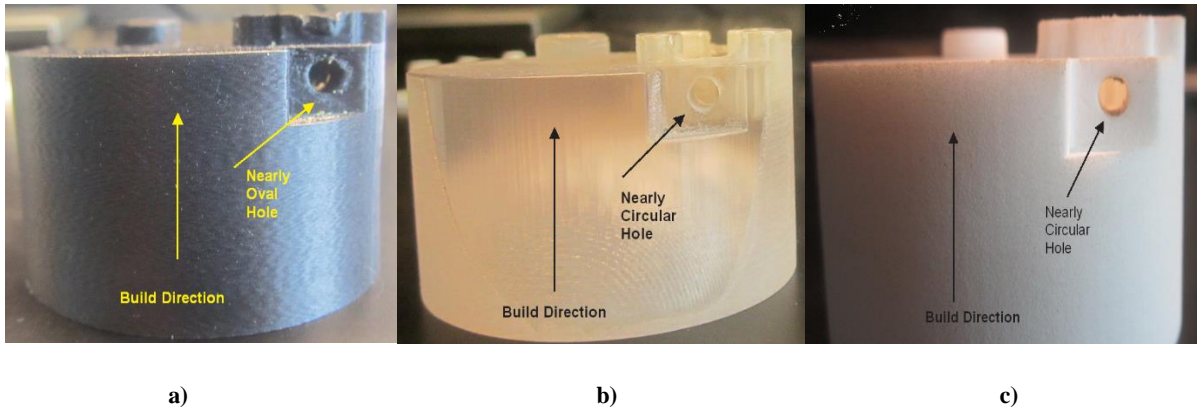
Different Accuracy for Creating a Hole in the same Build Direction, a) FDM Machine, b) Polyjet Machine, c) SLS Machine
